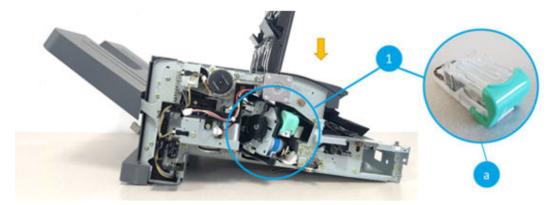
Inner finisher system - stapler unit detail view (2/2)
